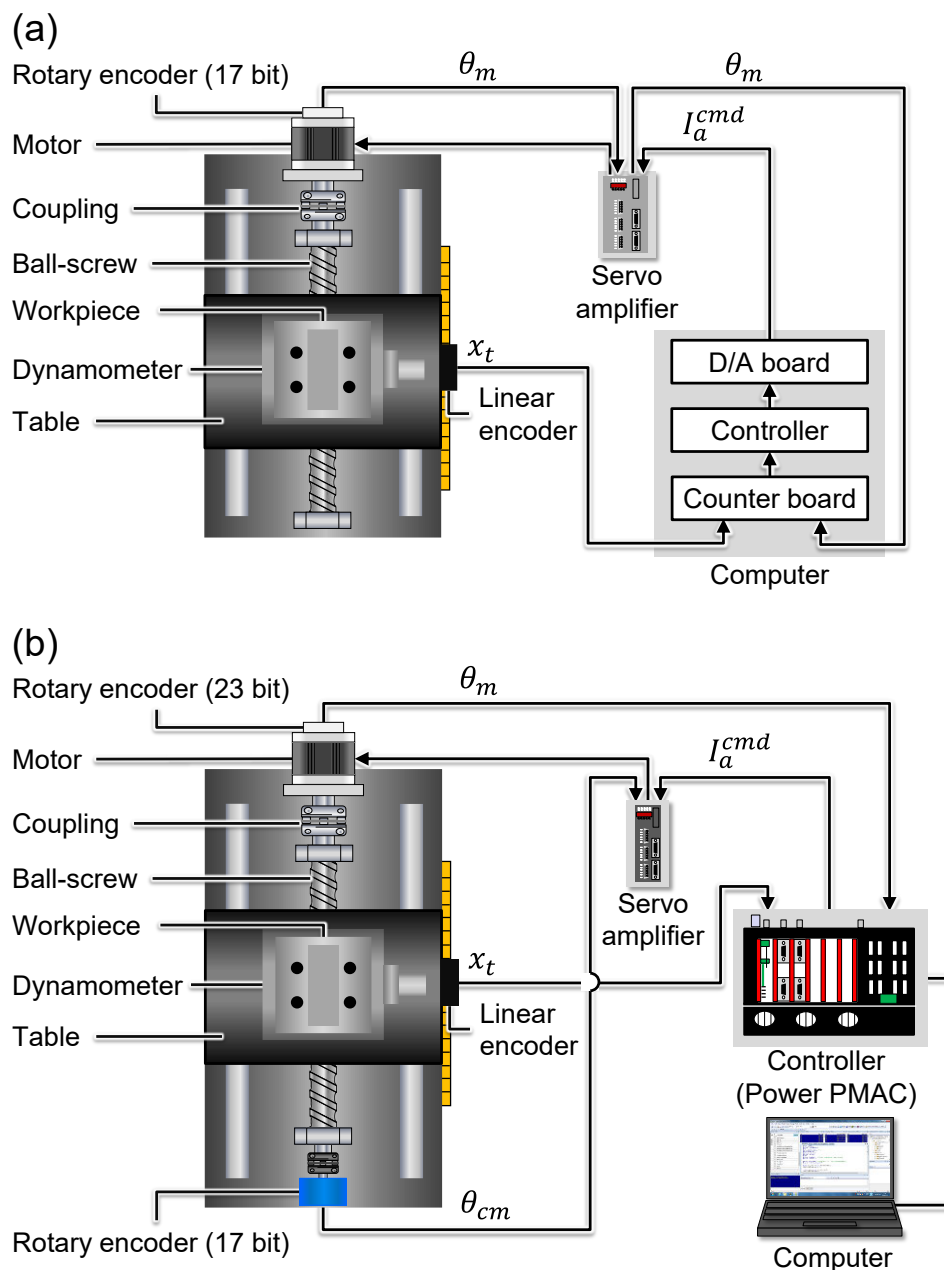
System configuration of experimental setup (a) Machine A (b) Machine B
